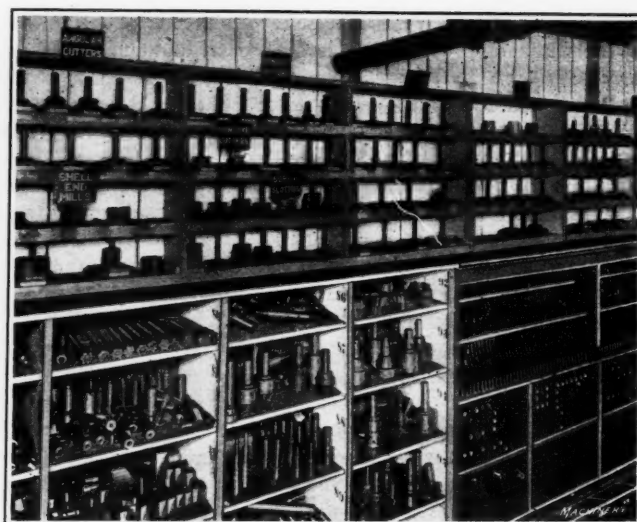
(Upper Section) Method of storing Milling Cutters on Shelves by Means of Special Holders
